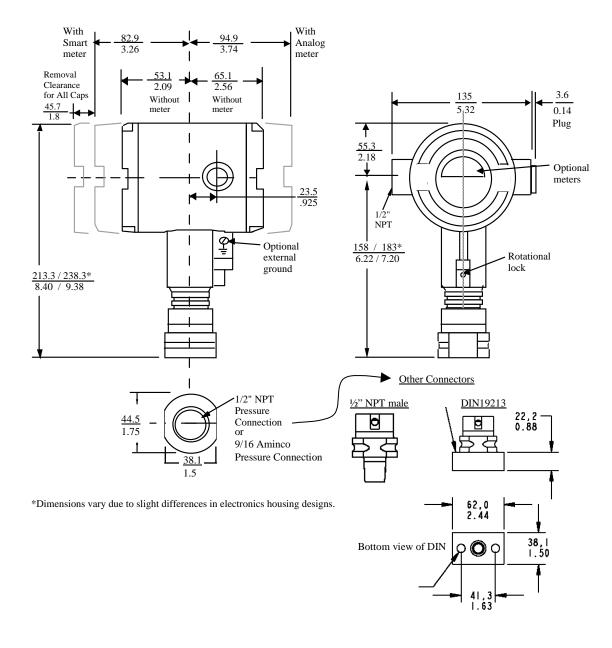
Typical mounting dimensions for in-line models STA92L, STA94L and STA97L
